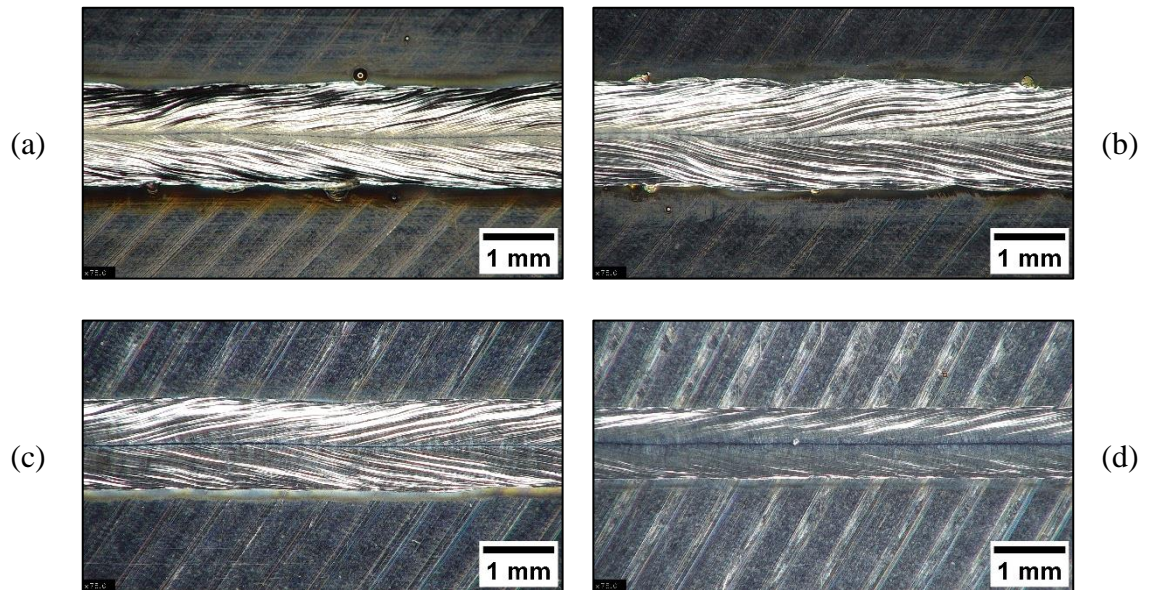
304L laser weld surfaces at 1000 W and travel speeds of 5 mm/s (a), 10 mm/s (b), 25 mm/s (c), and 50 mm/s (d).
